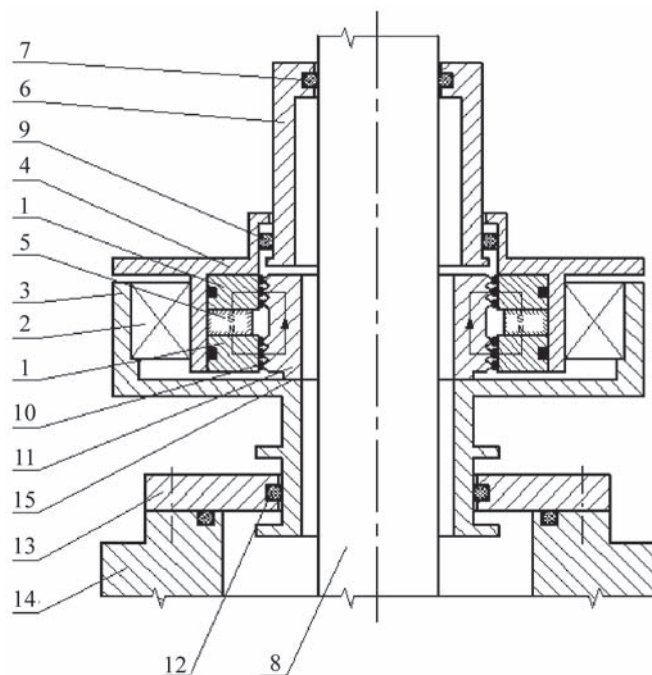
Magnetic fluid seal for vertical shaft with limited axial runout: 1 – pole shoe; 2 – thrust bearing; 3 – bearing casing; 4 – intermediate sleeve; 5 – permanent magnet; 6 – moving sleeve; 7, 9, 12 – sealing O-rings; 8 – shaft; 10 – magnetic fluid; 11 – sleeve with sealing lips; 13 – flange; 14 – casing; 15 – fixing of sleeve 11 with sleeve 3.
